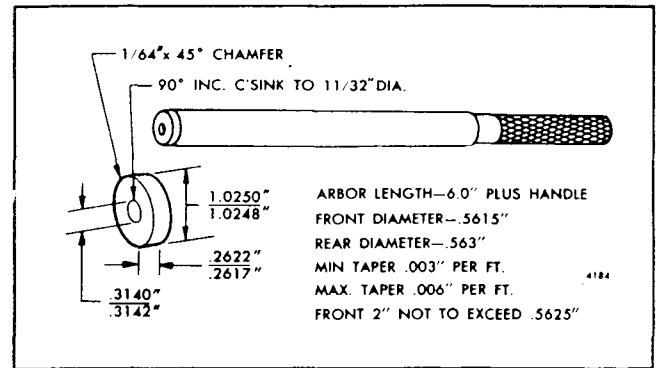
Fabrication of Governor Housing-to-Base Alignment Tool
